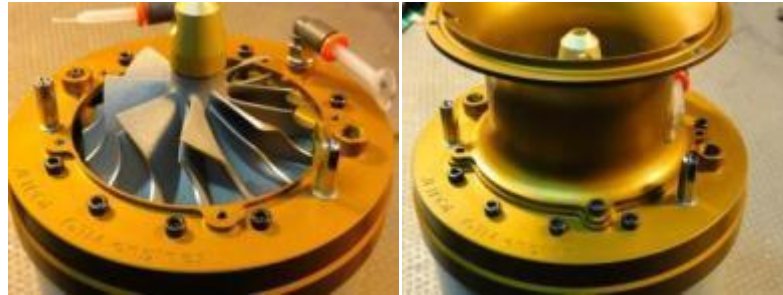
Centrifugal compressor and specifically designed inlet assembly of GTM-120[6]
